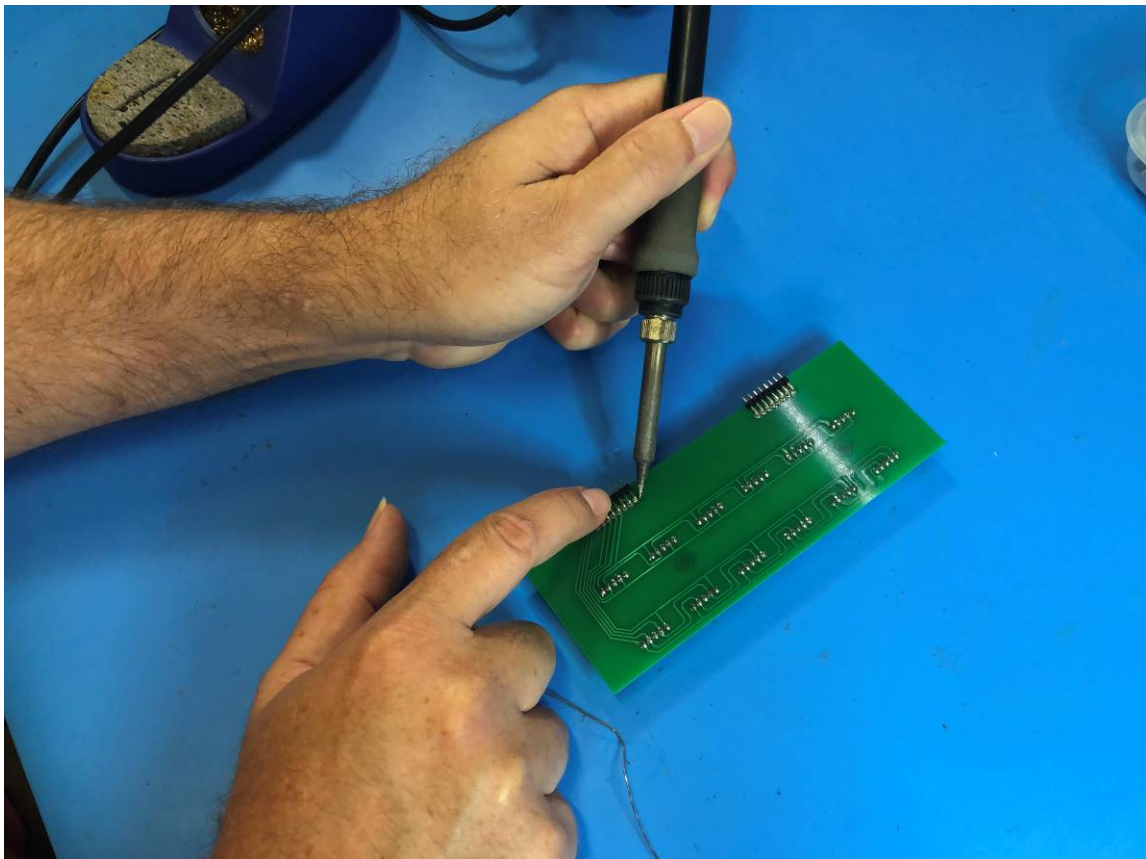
Solder a single pin of each header. Holding them carefully flat to the board. The black plastic strip should be lying flat against the rear side of the PCB
